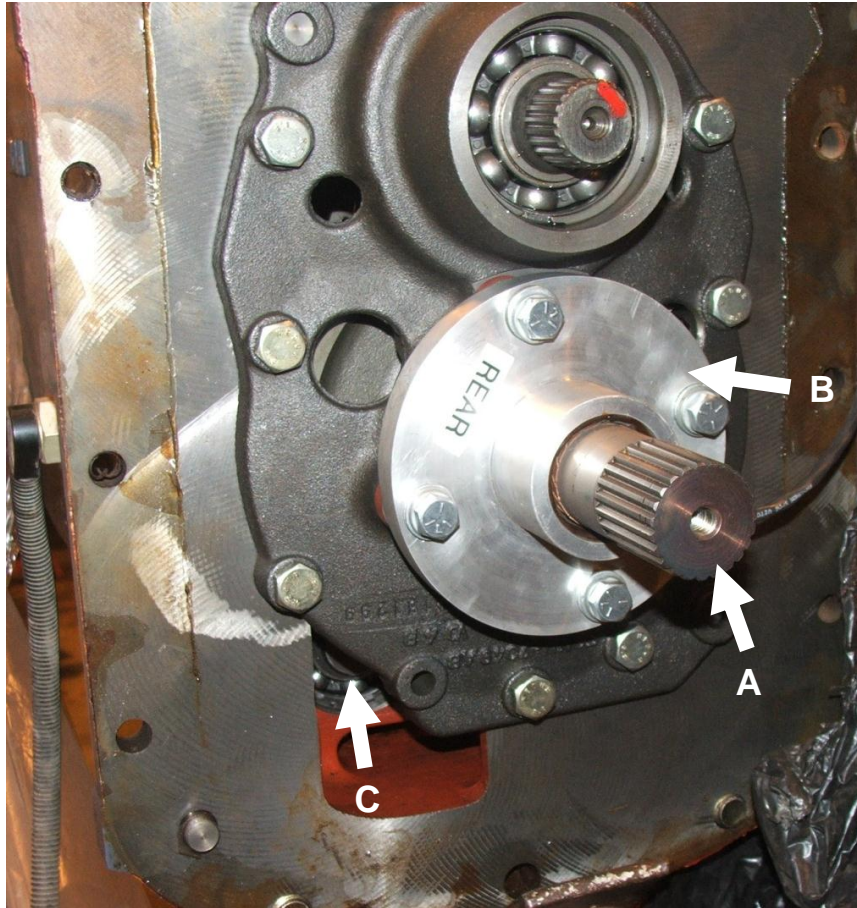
View of the rear of the main gearbox, showing the output shaft (A) and its associated Torductor housing (B). The front wheel driveshaft rear bearing (C) is also visible. (Source, author)
